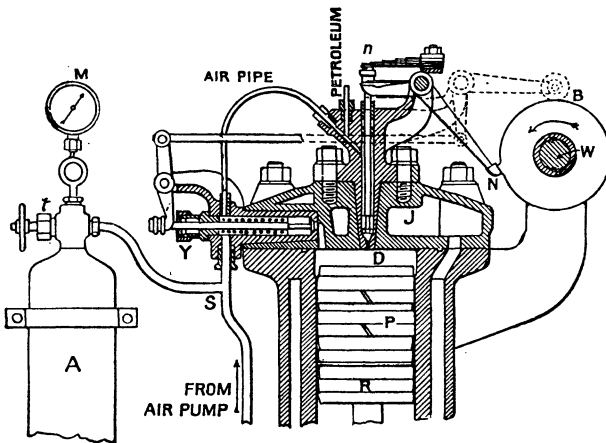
Diesel Oil Engine (Sectional Elevation)
